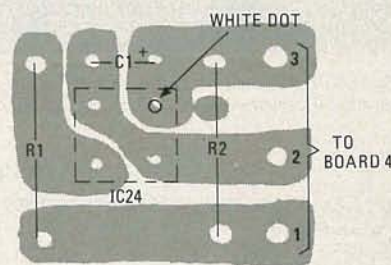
BE SURE that IC24 is aligned as shown when mounting it on board 6, the sensor board.
